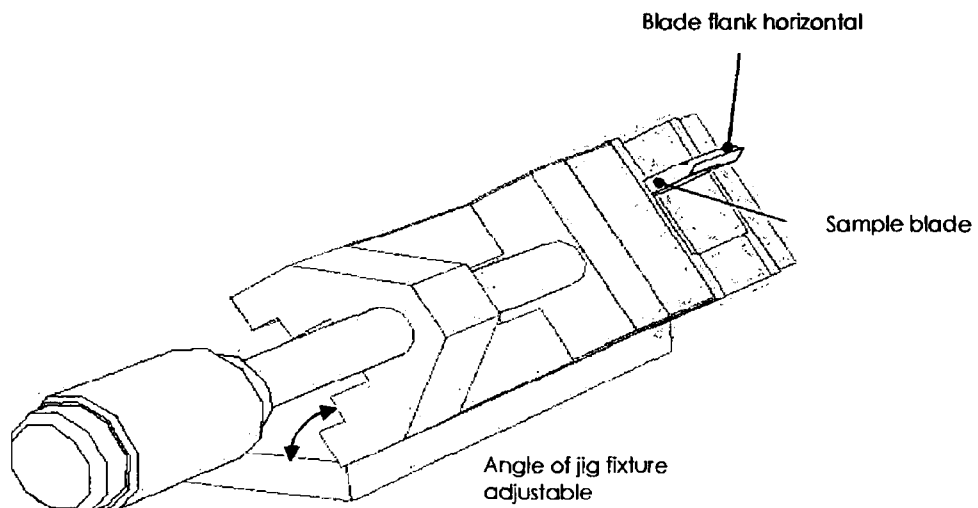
Jig fixture used for setting blade flank in horizontal direction
